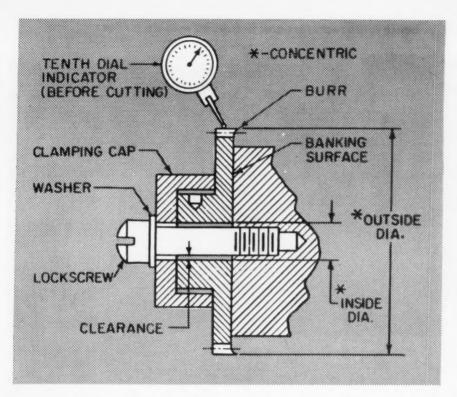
Line drawing giving details of a "floating" type arbor, as illustrated in Fig. 5.
